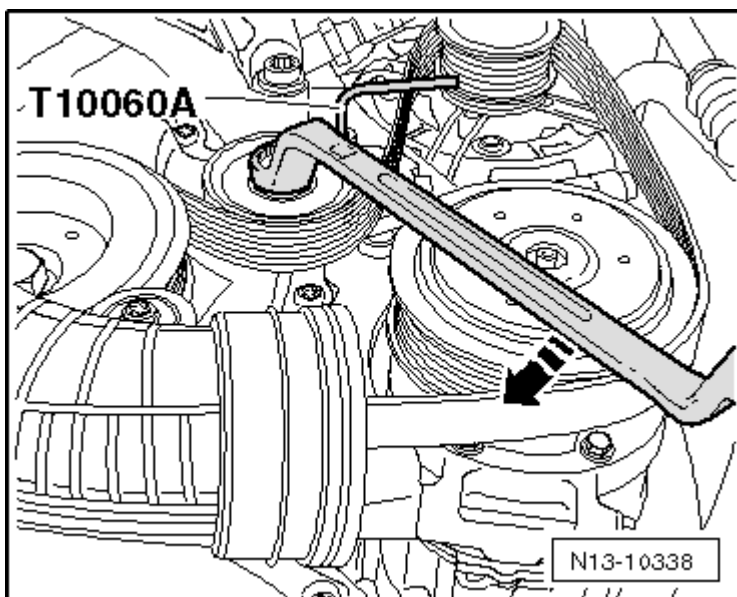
Identifying Wrench And Locking Pin -T10060 A-
